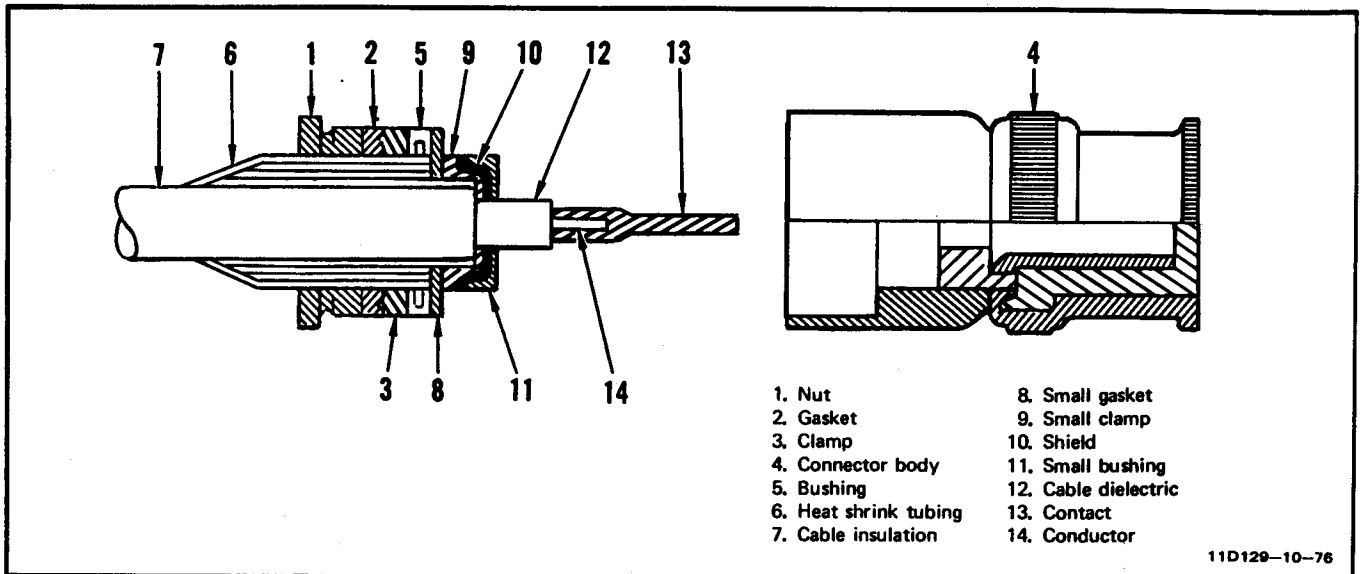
2675-1, 2742-1, and 3197 Triaxial Connectors (Typical)
